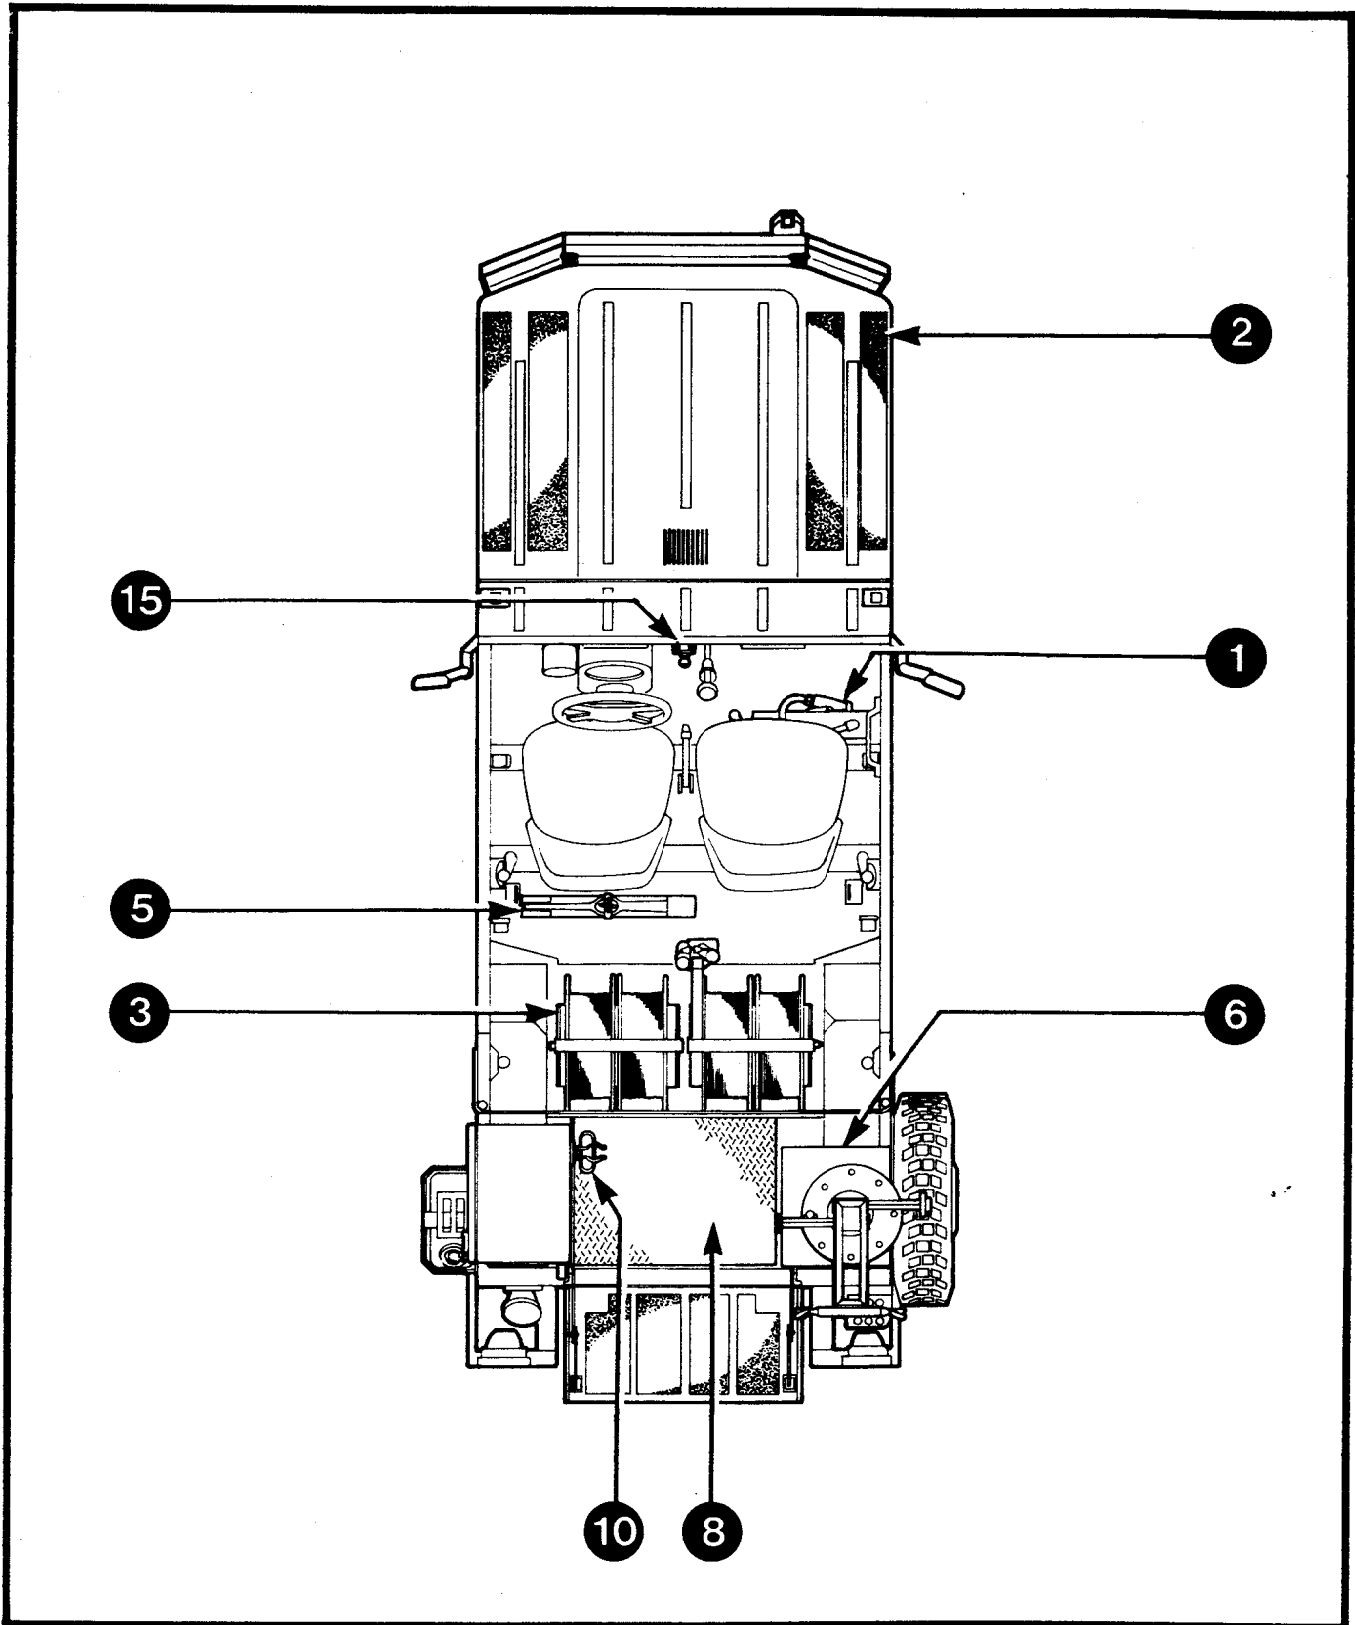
Installation of Equipment — Hood, Floor and Rear Deck
